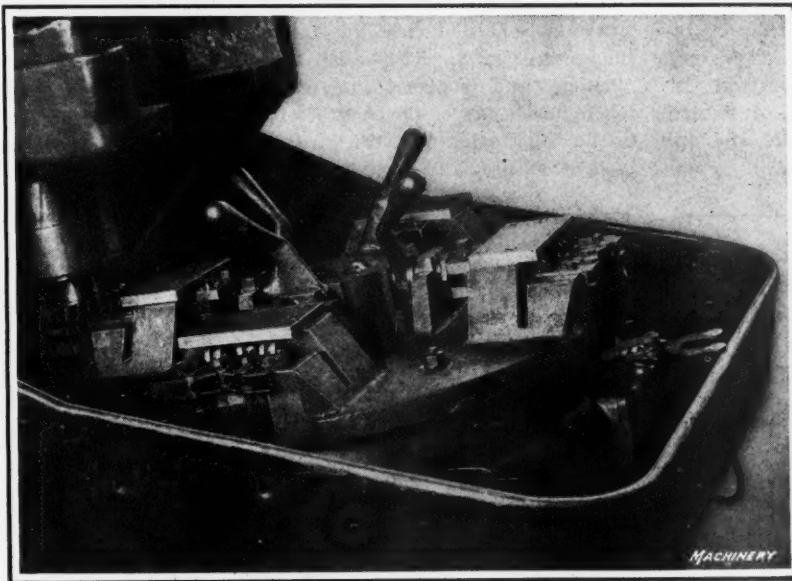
Machine equipped with Four-station Fixture for holding Clevises when station-milling them
